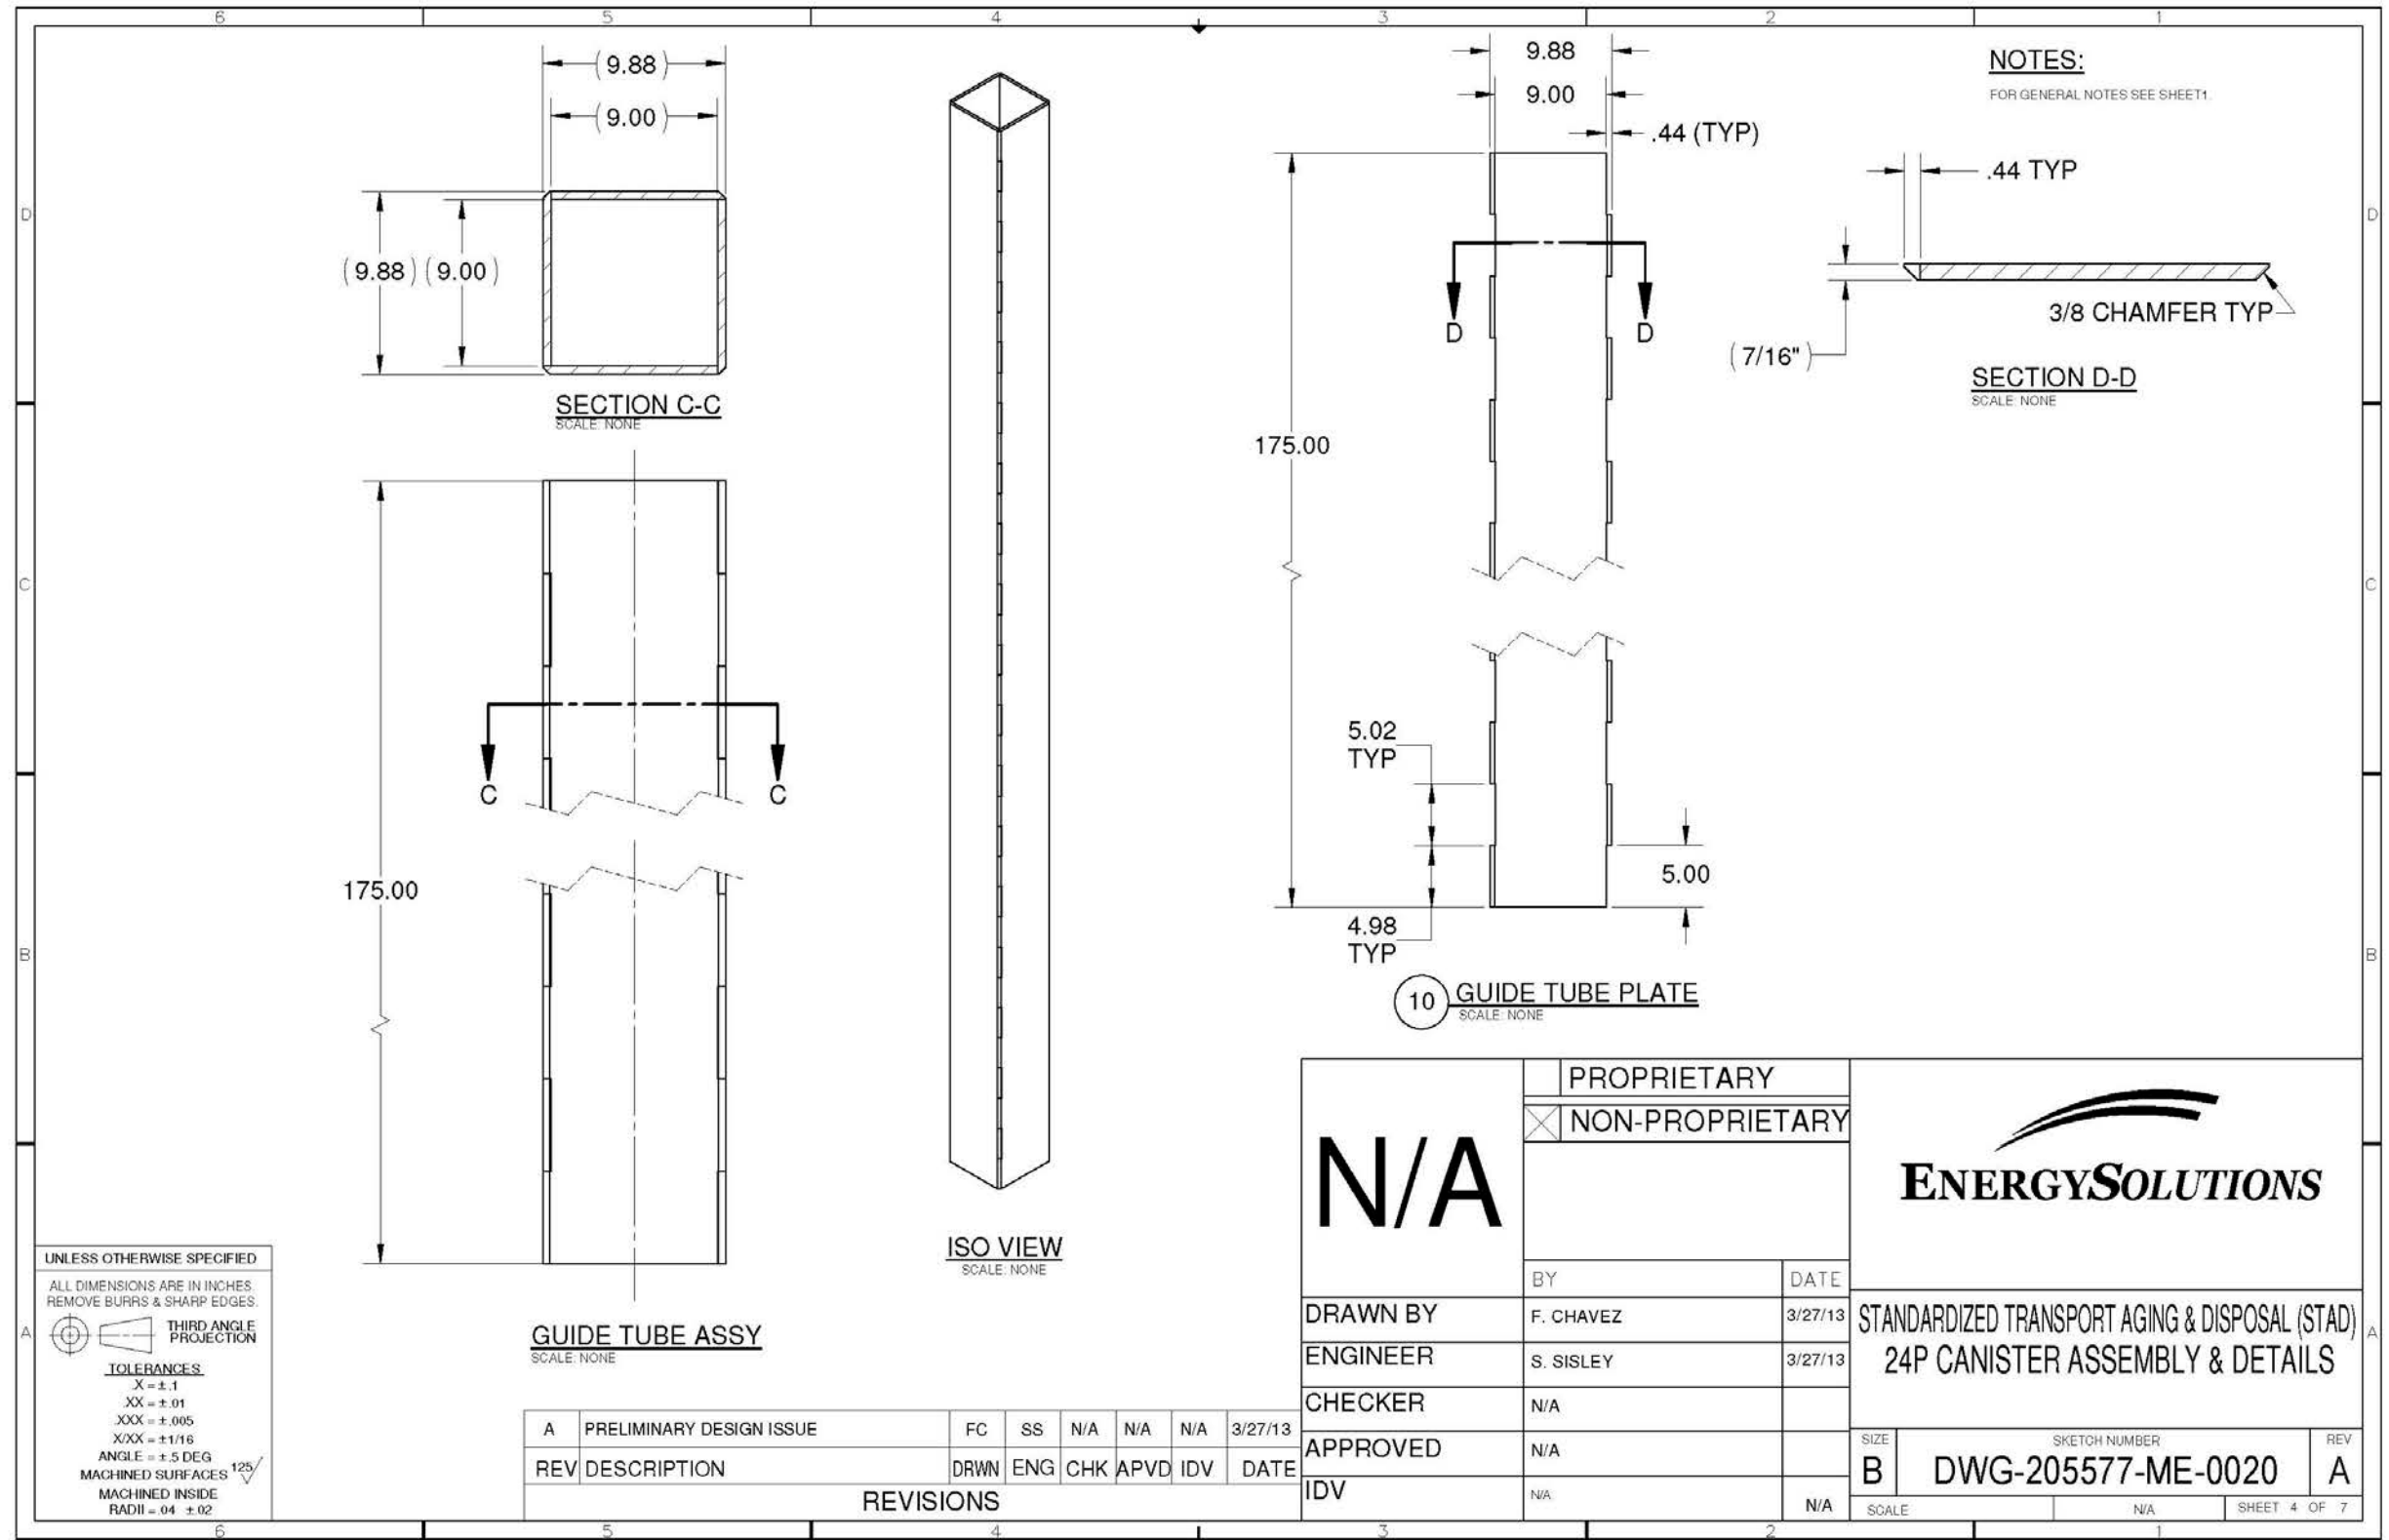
Standardized Transport, Aging and Disposal Canister - 24 PWR Assemblies - Assembly & Details – Sheet 5 of 7
